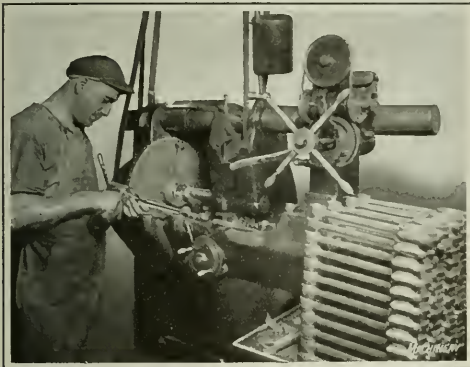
Internal Grinding Operation on Large End of Connecting-rod
